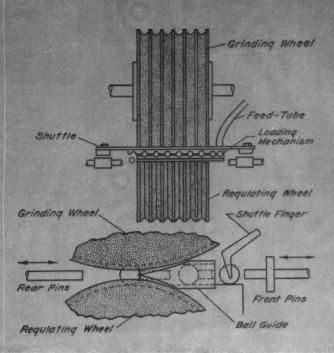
Drawing of loading and shuttling arrangements on a special centerless type grinding machine in which the balls are rough-ground
